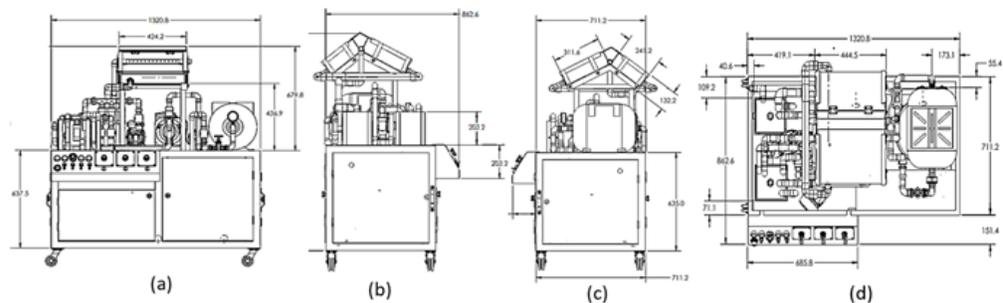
Orthographic views of the Prototype (a) front View (b) Left side view, (c) Right Side view (d) Top View
